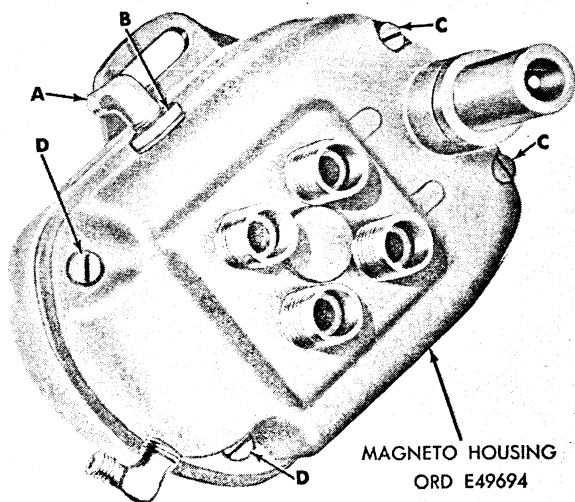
REMOVING OR INSTALLING MAGNETO HOUSING ATTACHING PARTS.
